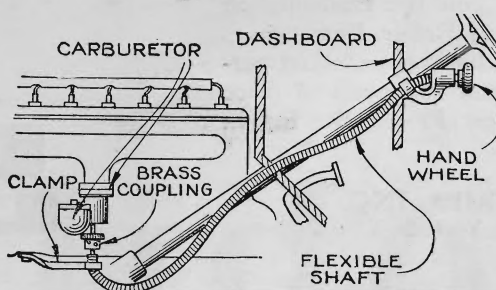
This hand control enables the driver to set the carburetor at the right mixture.
